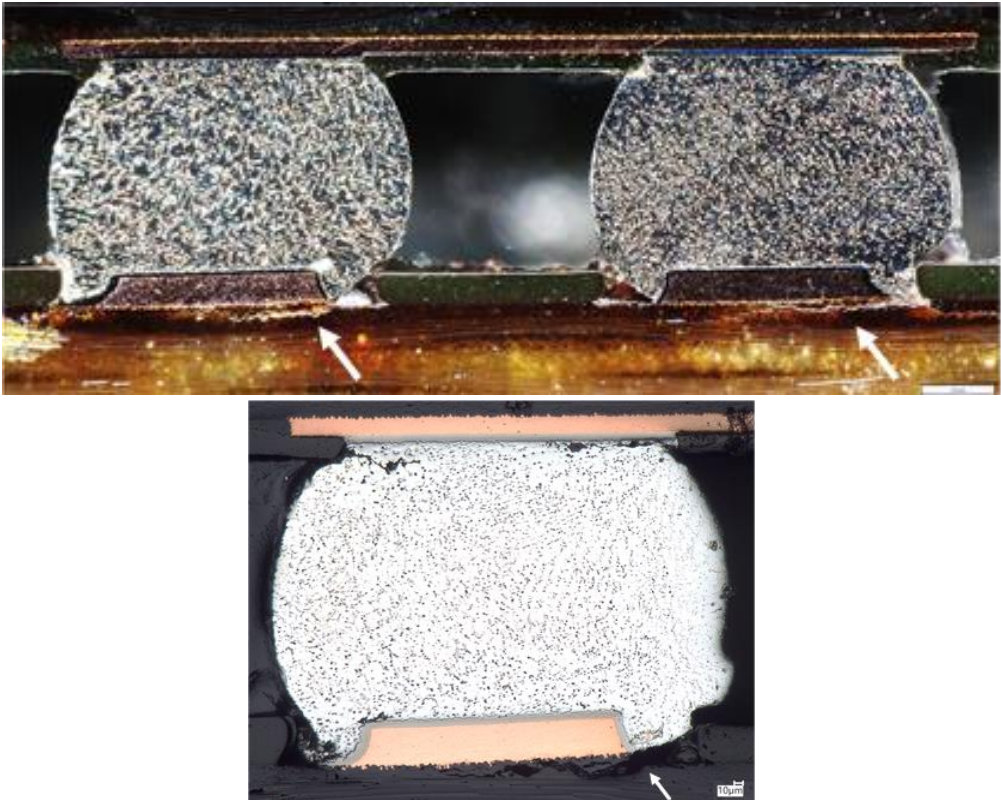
Laminate cracks under solder pads after harsh isothermal aging (1000h at 150°C) followed by thermal cycling (-55°C to 100°C)
